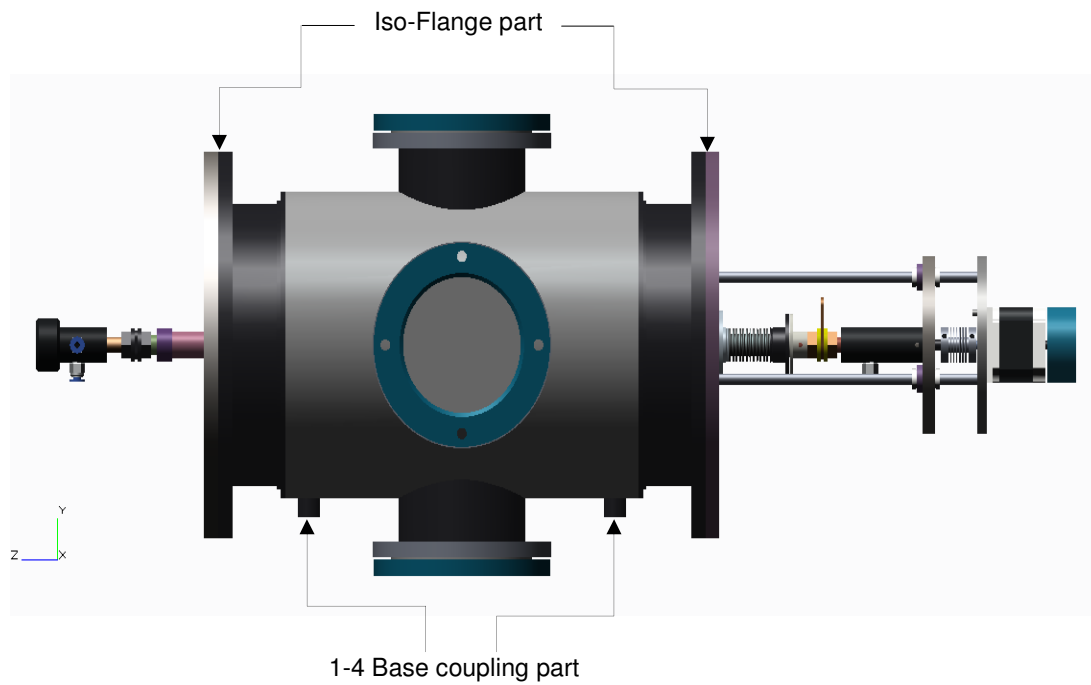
ISO-Flange and two 1-4 base coupling part
